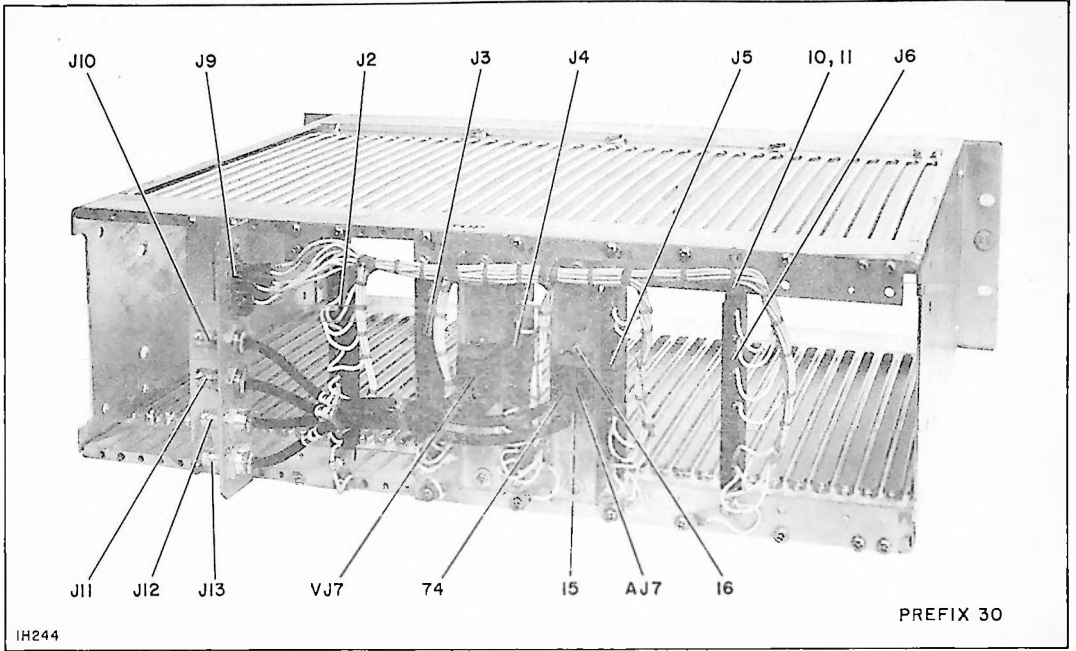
Frame Assembly MI-560595, Rear View – Prefix 30
